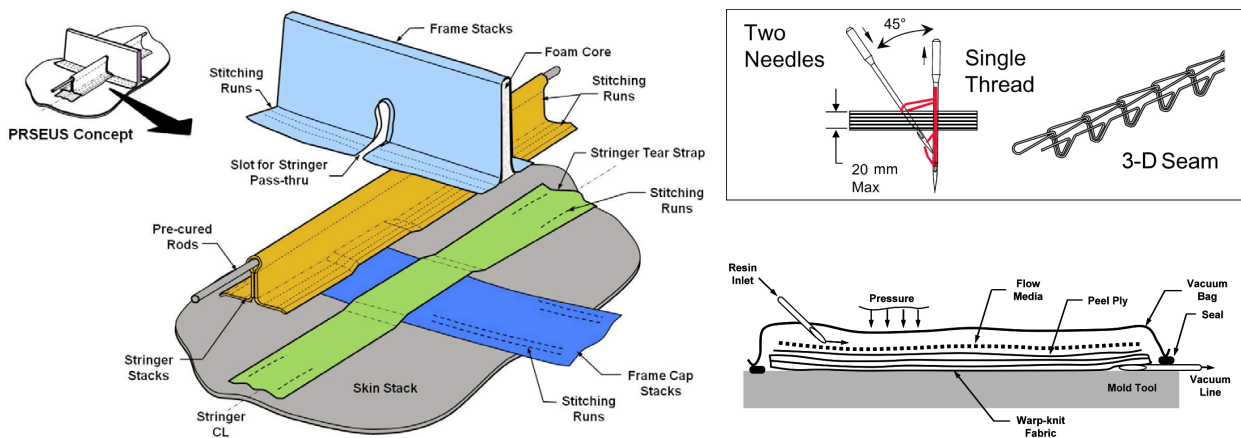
The PRSEUS dry preform is built up from carbon fabric stacks for the frame, stringers and skin. The layers are stitched together with Vectran fibers, using a single-sided sewing method, then bagged and infused with resin [10].
